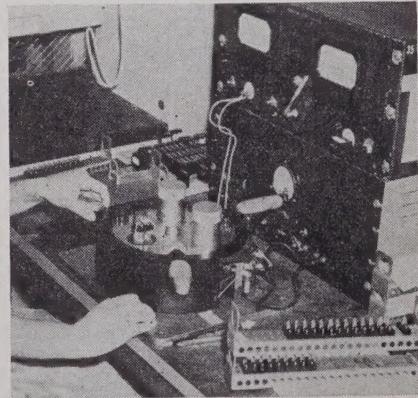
Machine for final adjustment of plated crystal units by evaporation process.
